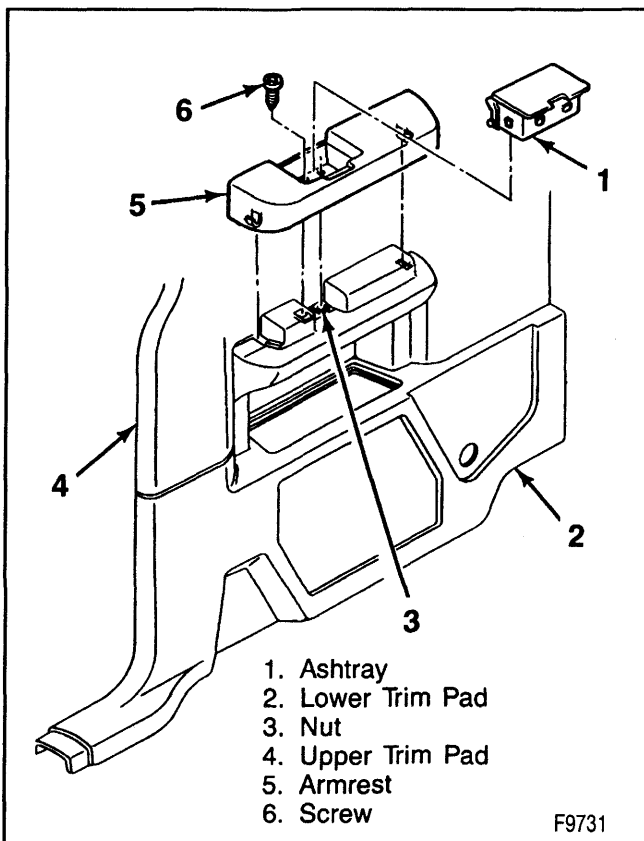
Side Rear Lower Panel (Extended Cab with Armrest)
